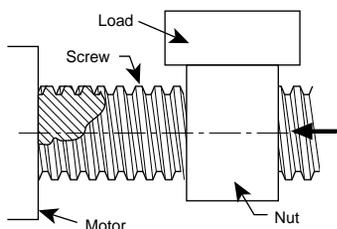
As the lead screw rotates, the load is translated in the axial direction of the screw.
